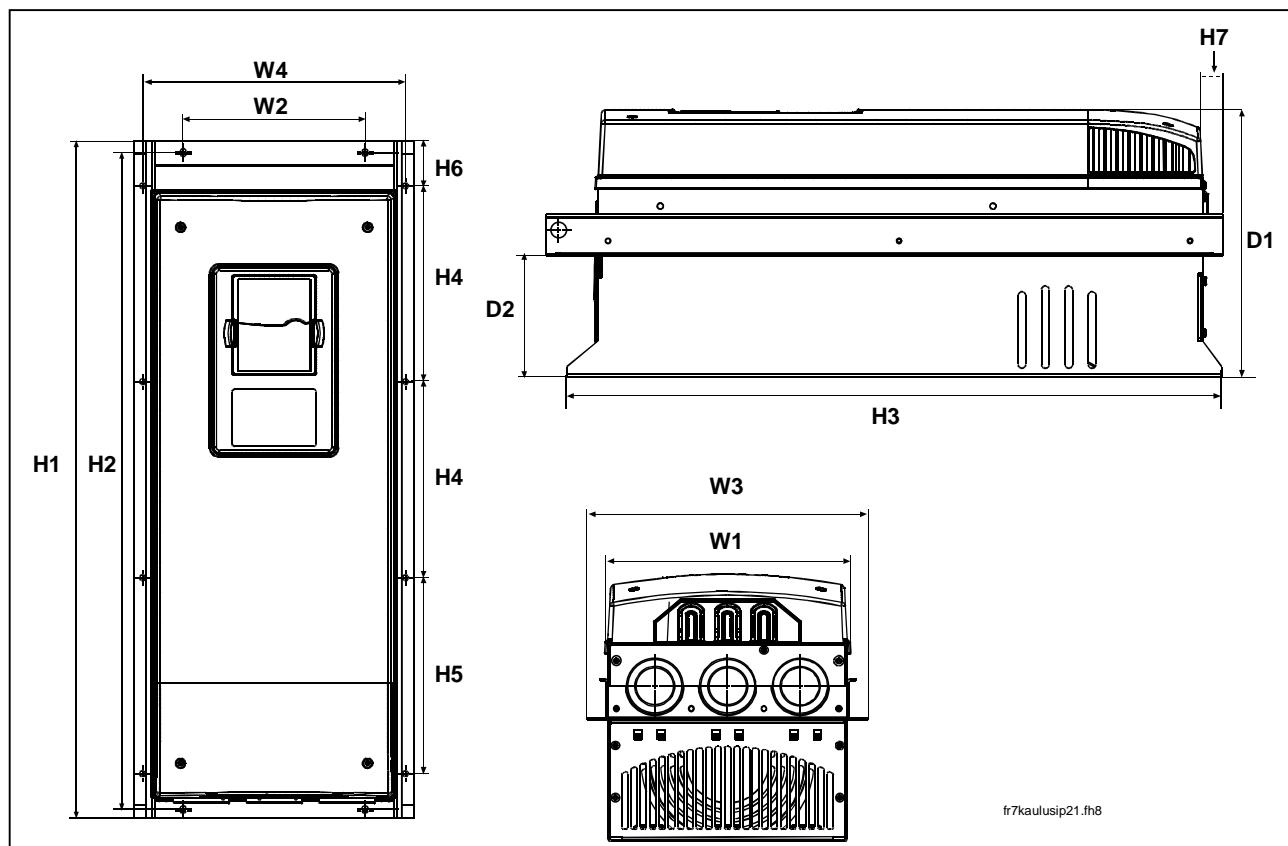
Vacon NX_ dimensions, FR7 and FR8, flange mounting
